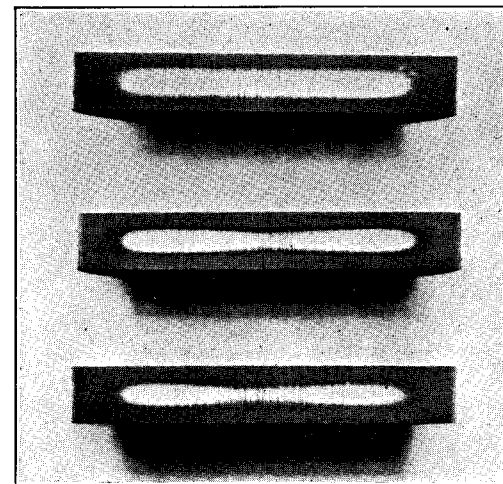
A Standard ¾-Inch Slab Test Piece and Two Test Pieces from Different Heats Showing Varying Degrees of Dumb-bell Fracture.
